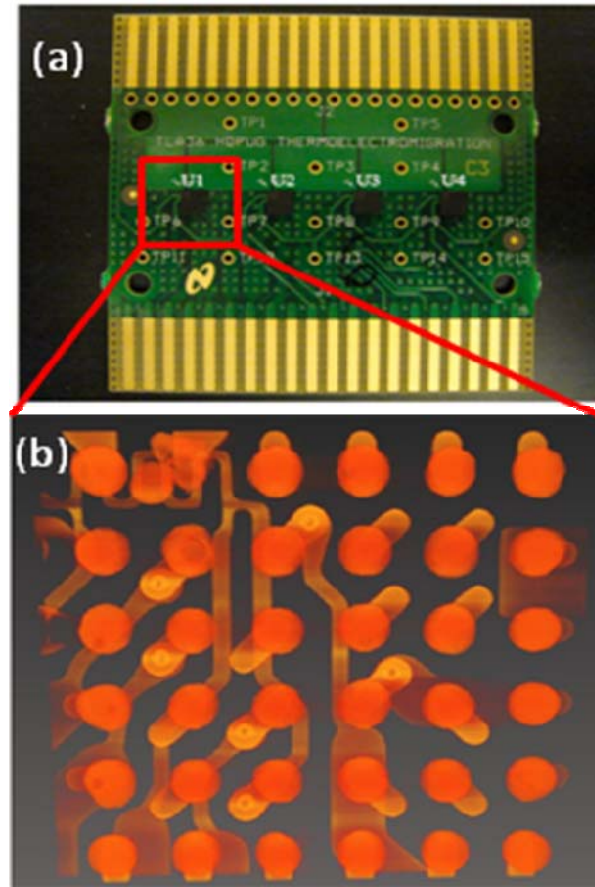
(a) a single test PCB with 4 test chips labeled as U1, U2, U3 and U4, (b) reconstructed micro-tomography 3D image of a failed test chips, with a melted solder ball at the upper left corner region.
